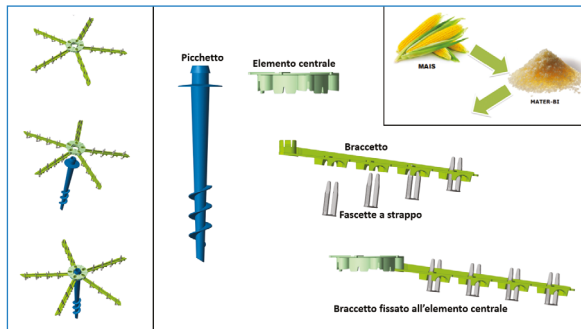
| Modular system for anchoring plant organisms (Italian Patent no. 102015000081824/2018). Caption: picchetto = stake; elemento centrale = central hub; braccetto = arm; fascette a strappo = tear strips; braccetto fissato all'elemento centrale = arm fixed to central hub.
